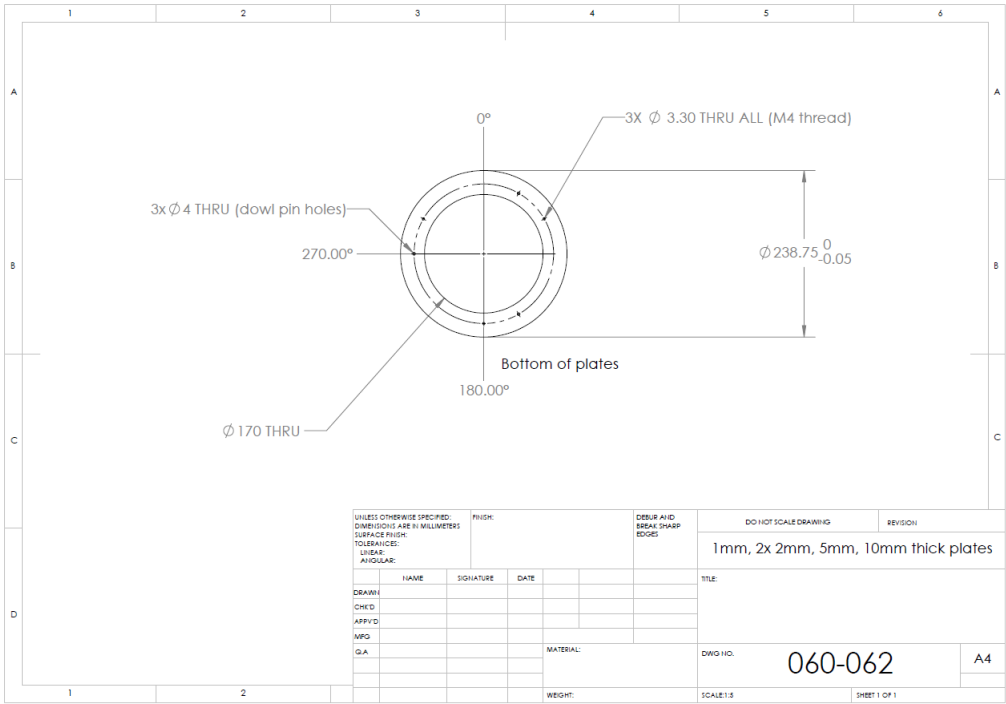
Drawing of the spacer plates for both the HV and ground electrode.
